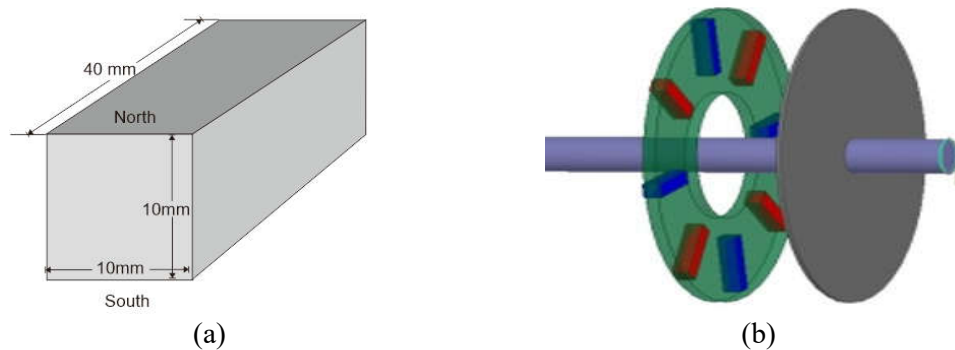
(a) Dimension of permanent magnet, (b) placing the magnets on the rotor casing.
